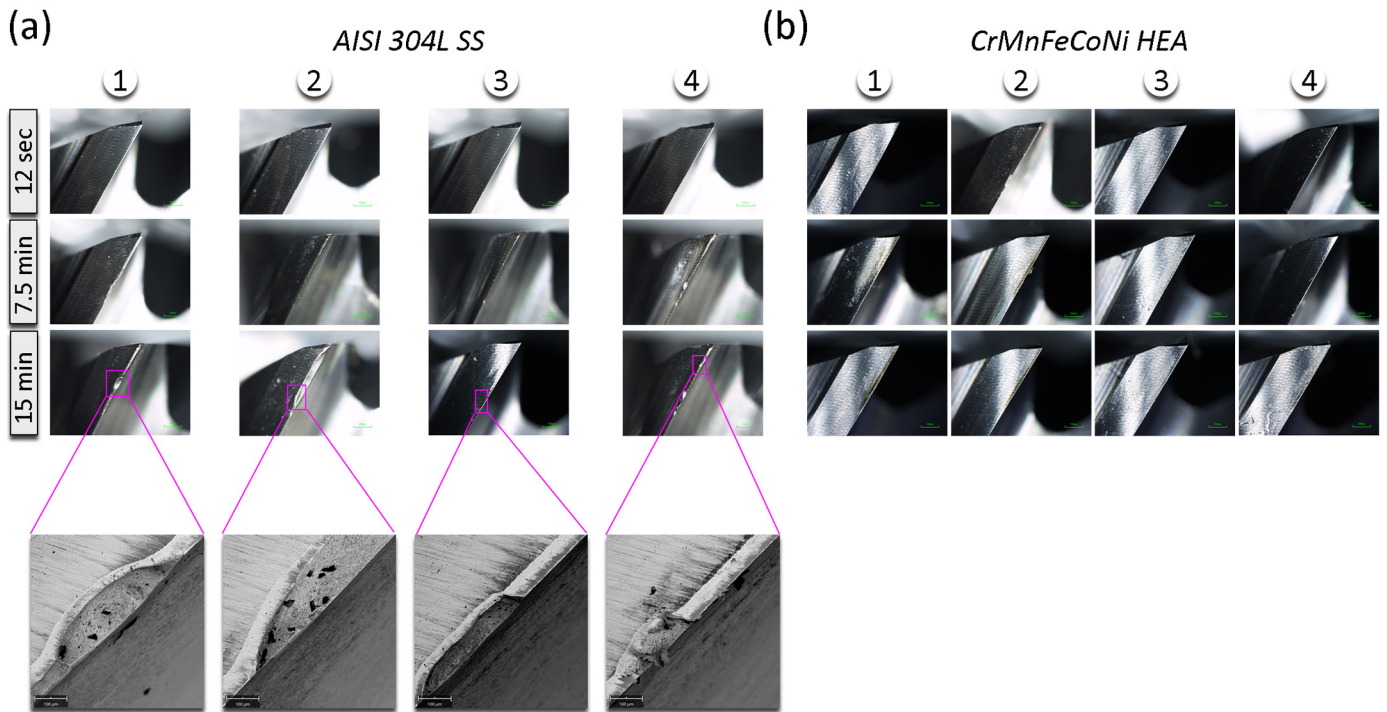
Tool flank wear progression for a four-flute end mill in machining of (a) AISI 304L stainless steel and (b) CrMnFeCoNi HEA. SEM images in the inset (Fig. 9(a)).
